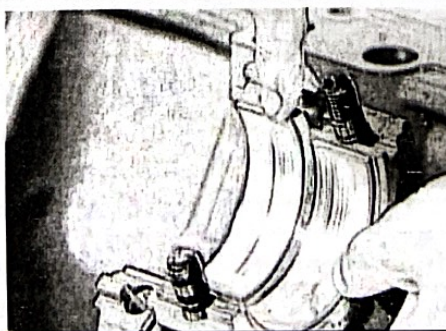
Check Crankshaft, Main Bearing and Connecting-rod Bearing Shell
